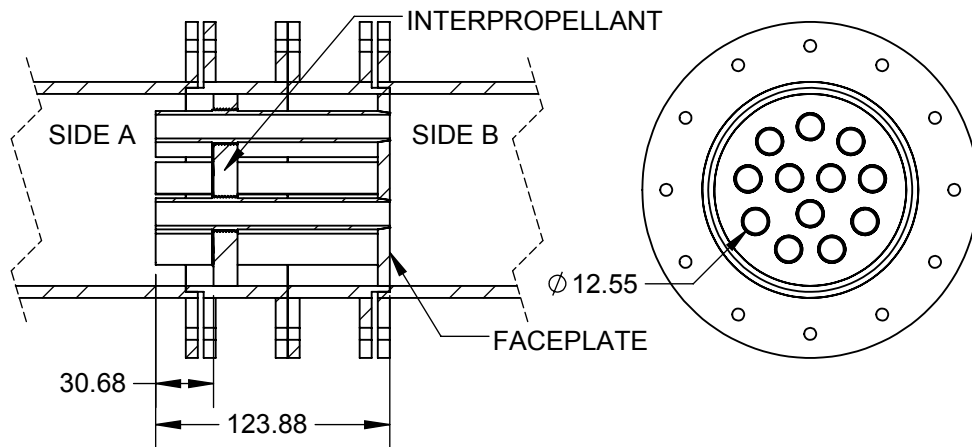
Front and sectional views of the mounting assembly for multiple straight half-wave resonators installed in the two-sided impedance tube, with dimensions (in mm).
